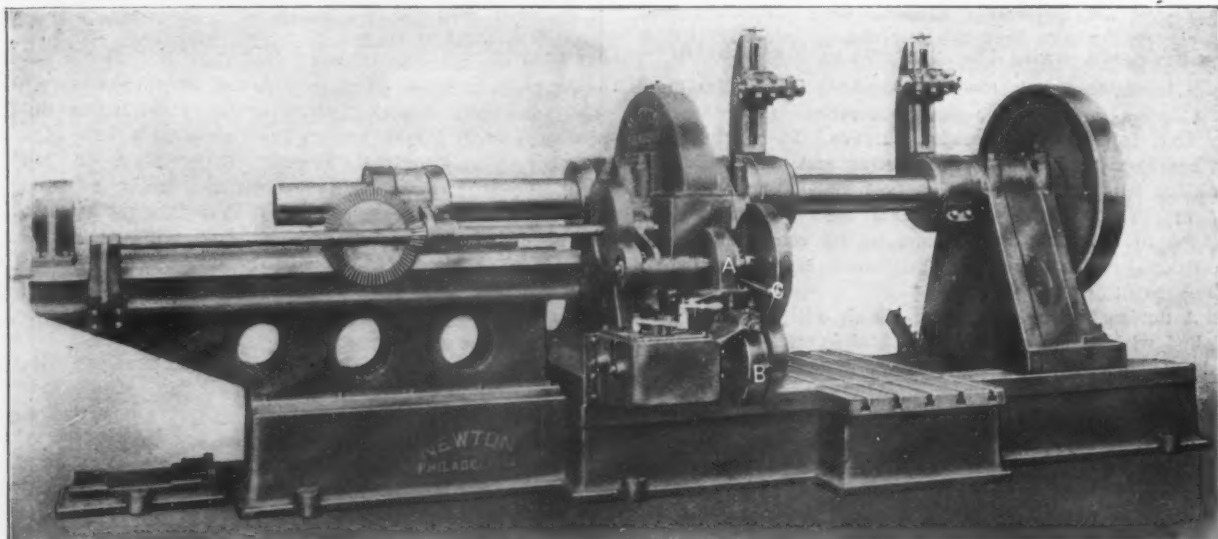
The New No. 3 Cylinder Boring Machine Built by the Newton Machine Tool Works, Philadelphia, Pa.
